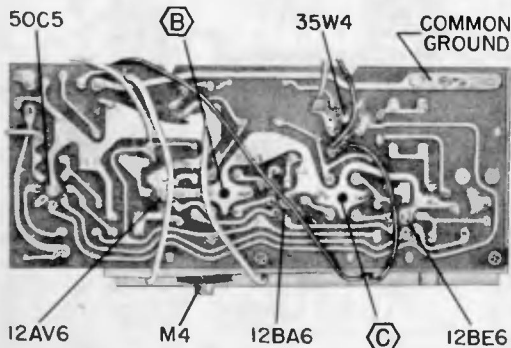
Bottom View of 5D4 Chassis Showing Alignment Points and Tube Locations. 5B4 chassis has same location for tubes and alignment points. Common ground is also the same.
